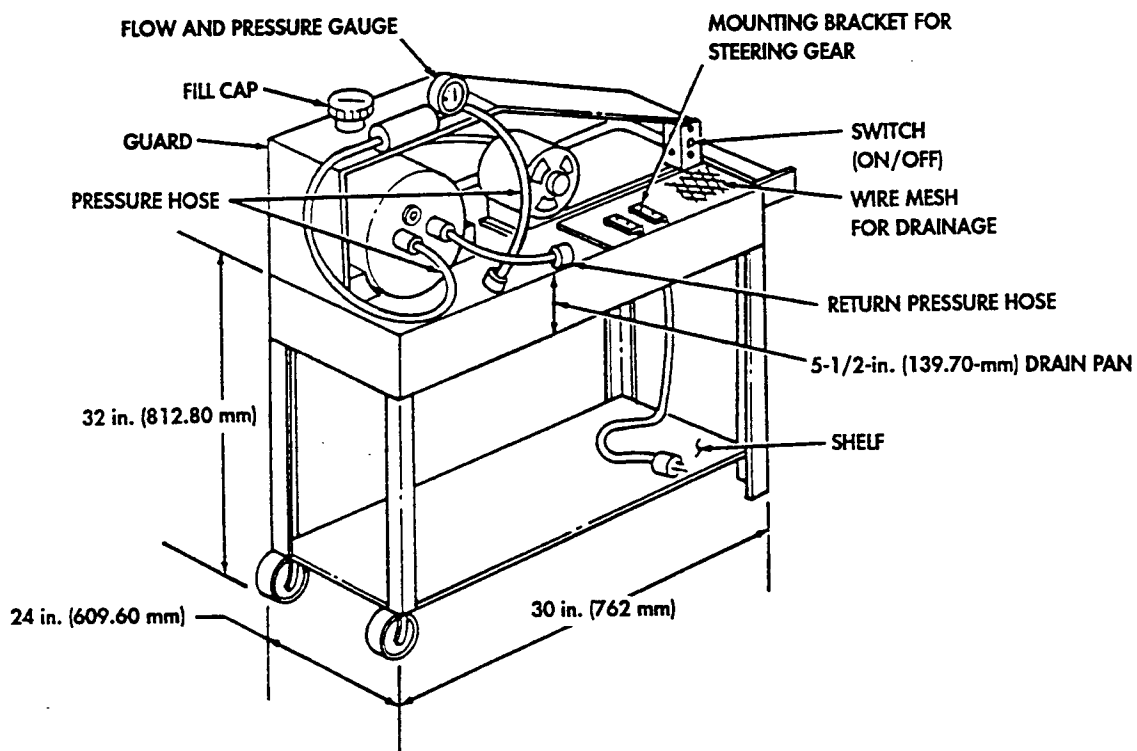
Power Steering Pump and Steering Gear Test Stand.
